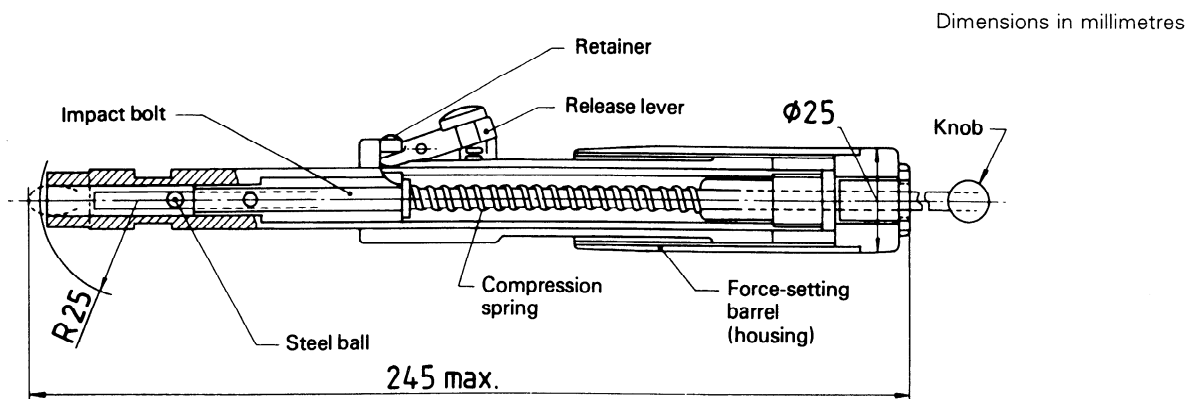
Impact tester (shown with spring compressed) (see 11.3.1)
